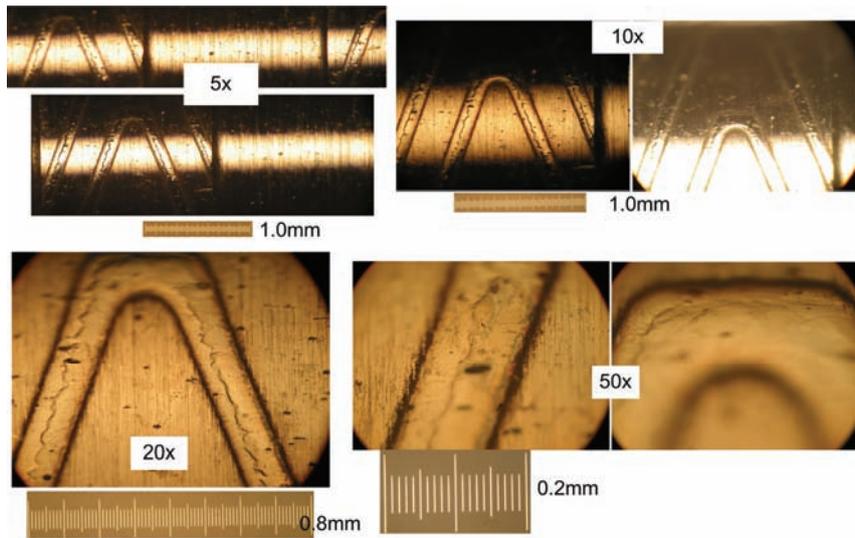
Bearing sleeve surface with micro-grooves - bearing from 2.5" HDD Samsung HM 160 HI
